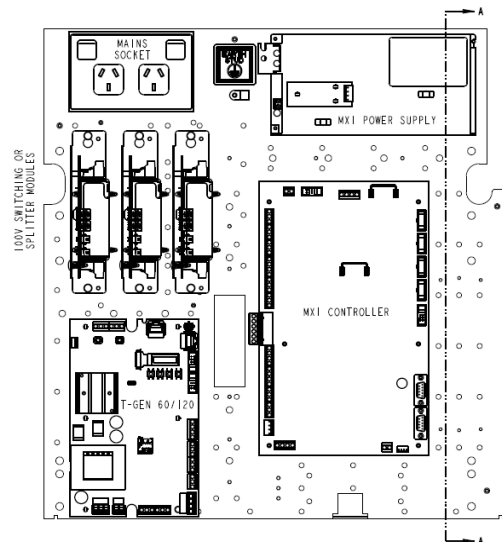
Internal Layout of MX1 15U Cabinet Gearplate showing T-Gen 60
